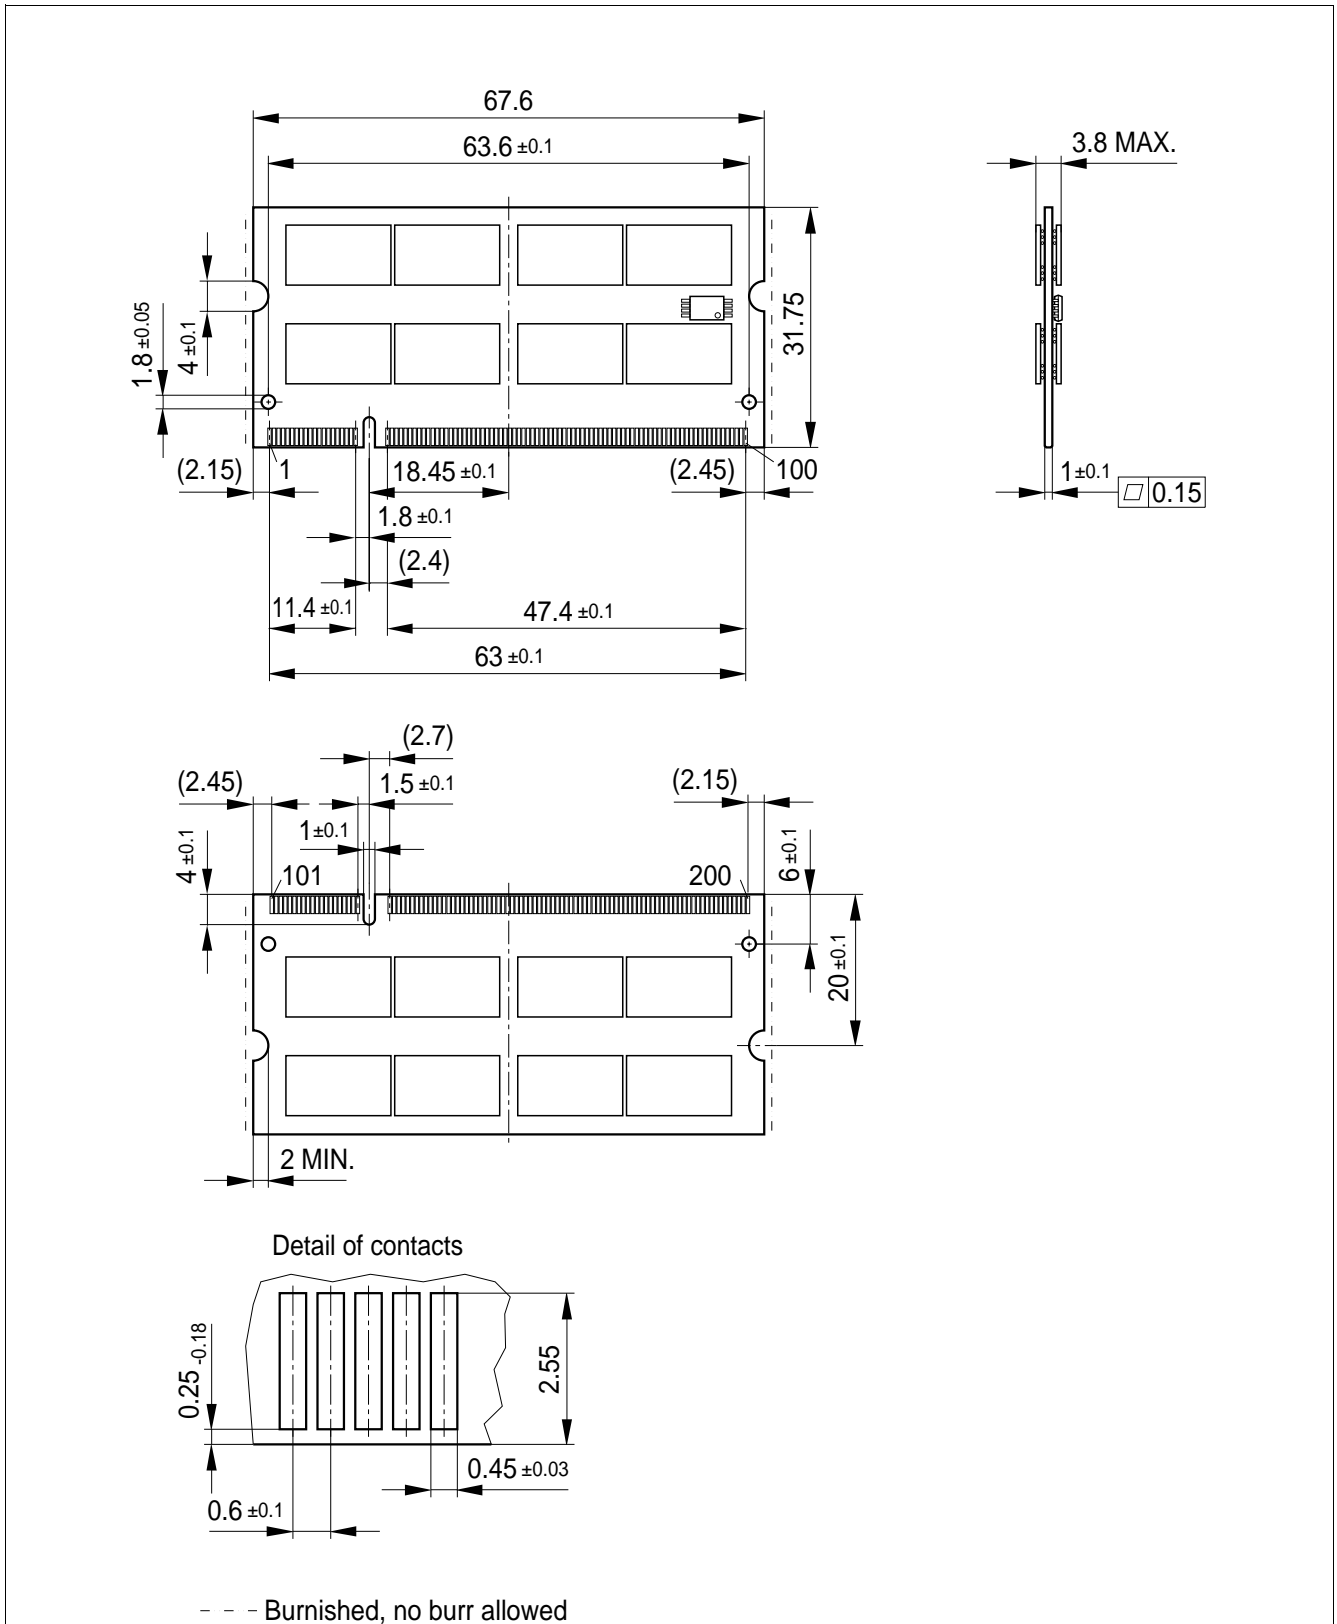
Package Outline SO-DIMM Raw Card Z (L-DIM-200-9)
